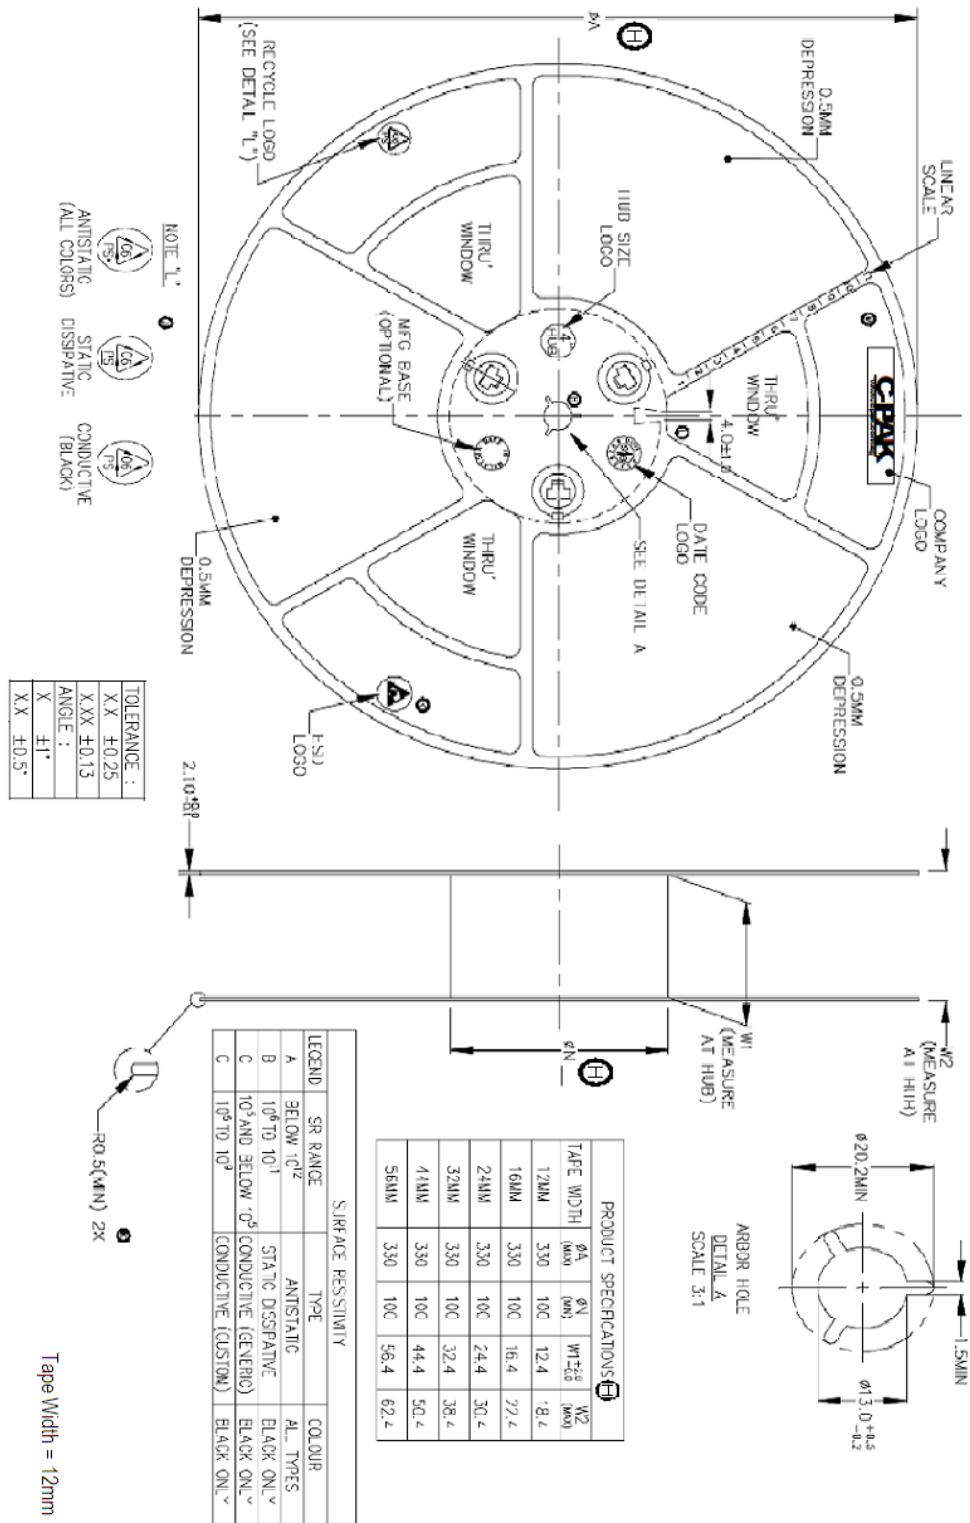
FT232RQ and FT245RQ Reel Dimensions
